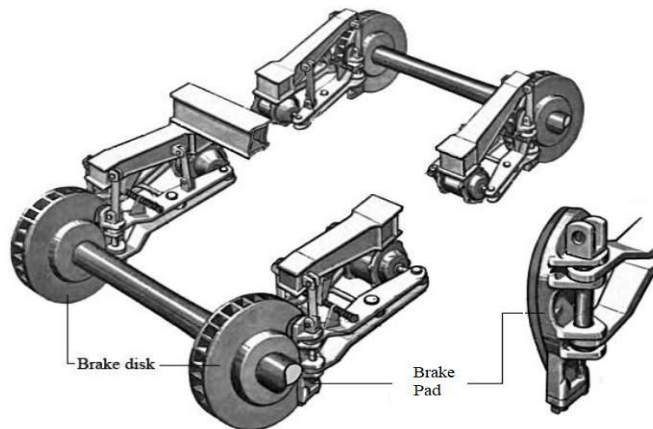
Disc brakes and pads installed on rolling stock bogie [5]
